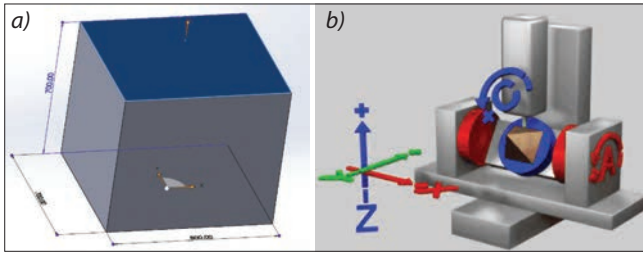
Concept of the design of the milling machine: a) dimensions of the working space, b) model of the milling machine with marked axes [12]
